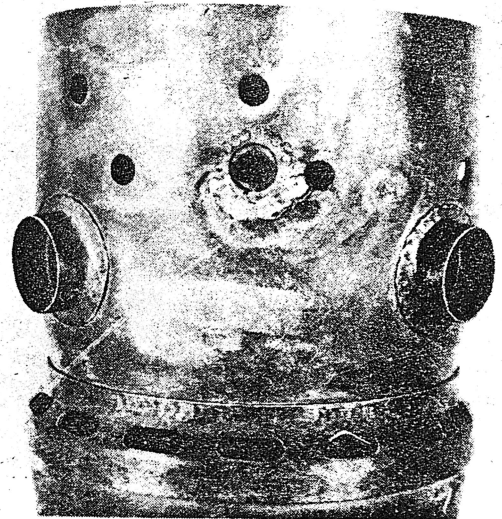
Crack shown in fig. 3 welded by oxy-acetylene process
